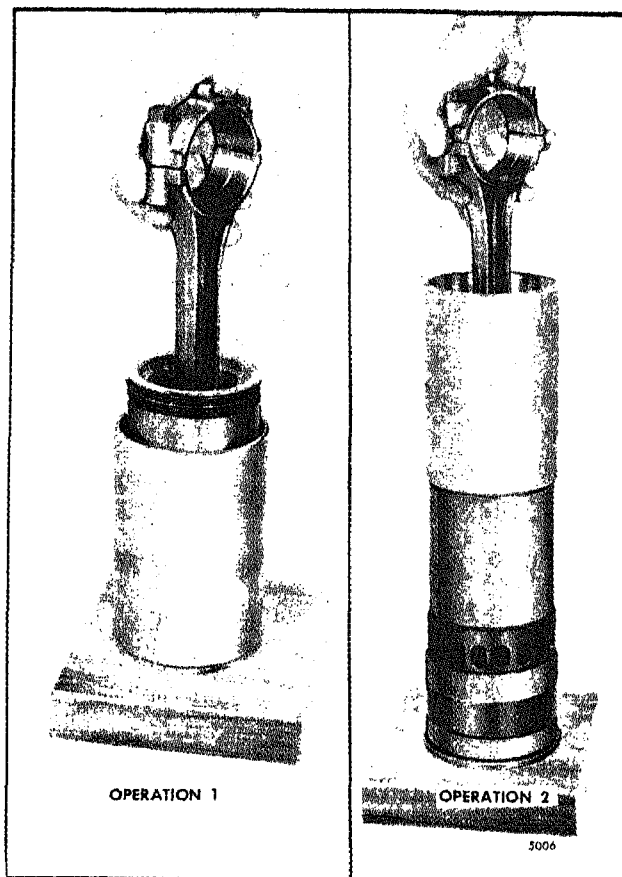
Installing Piston and Connecting Rod Assembly in Ring Compressor and Cylinder Liner
